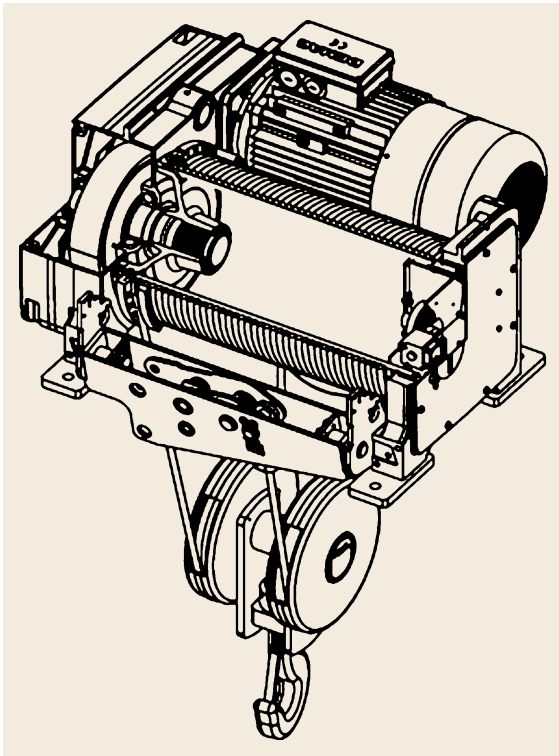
Standard electric hoist with C-shaped design (Demag Cranes & Components, Solon, USA)
